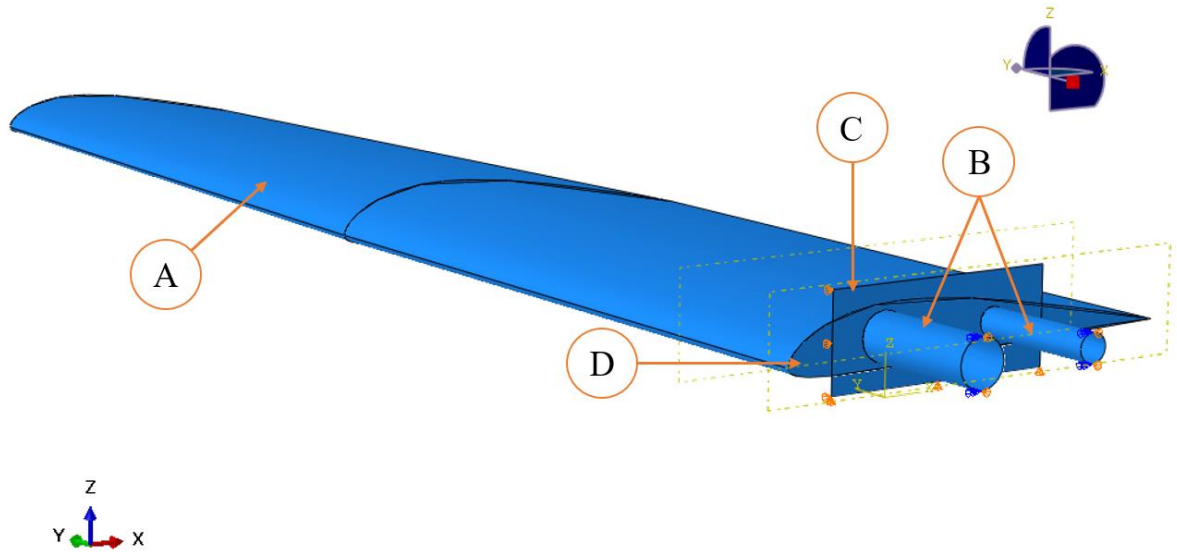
Half-wing model; A) Wing skin; B) Spars; C) Fuselage part; D) Rib
